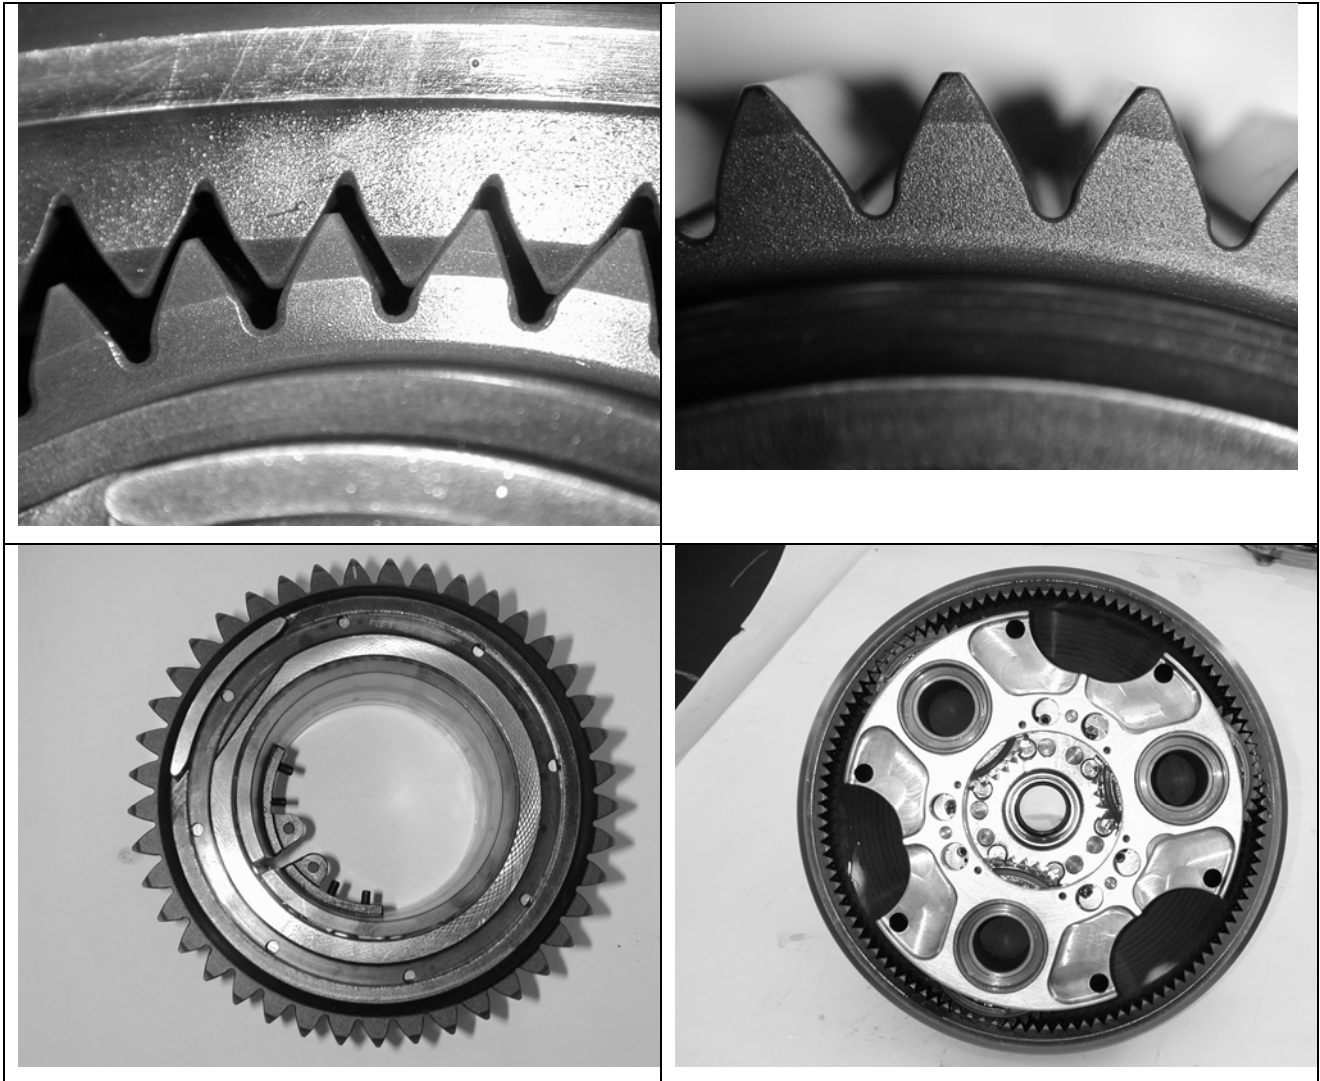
Asymmetrical gears - some of the TV7-117S turboprop engine gearbox components and assemblies
